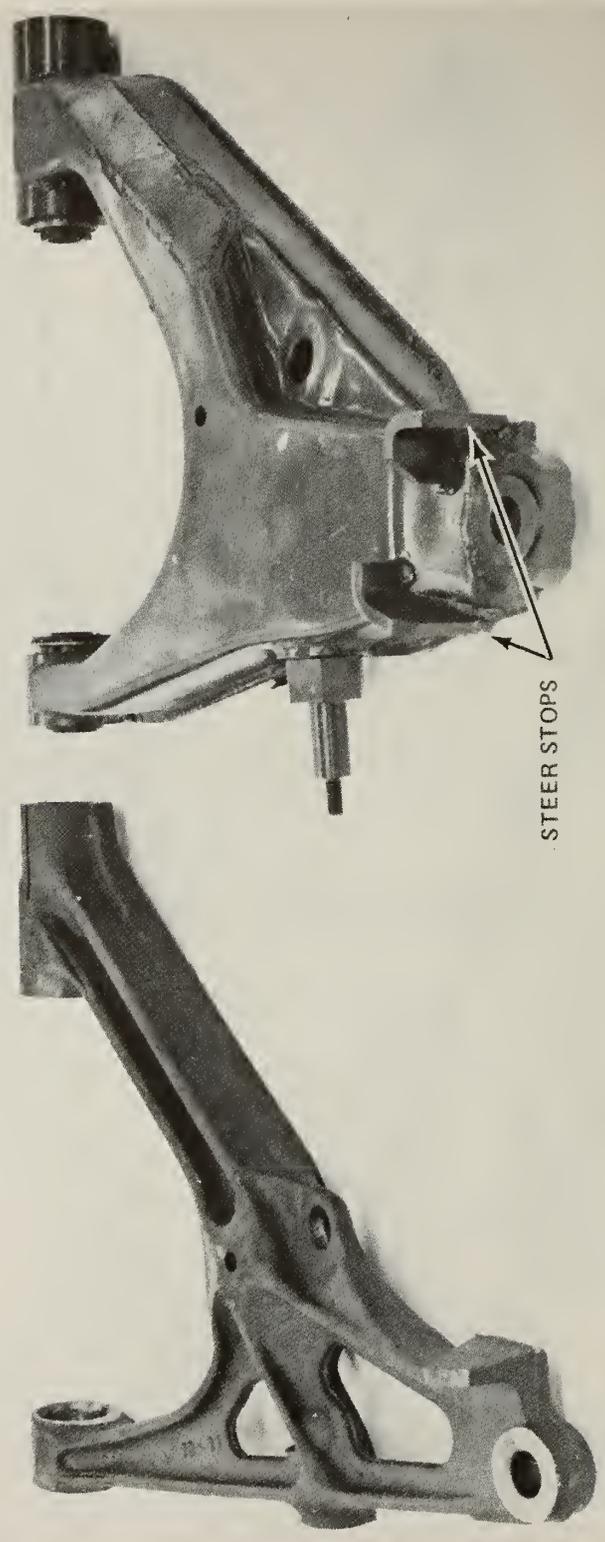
FRONT SUSPENSION LOWER CONTROL ARM
